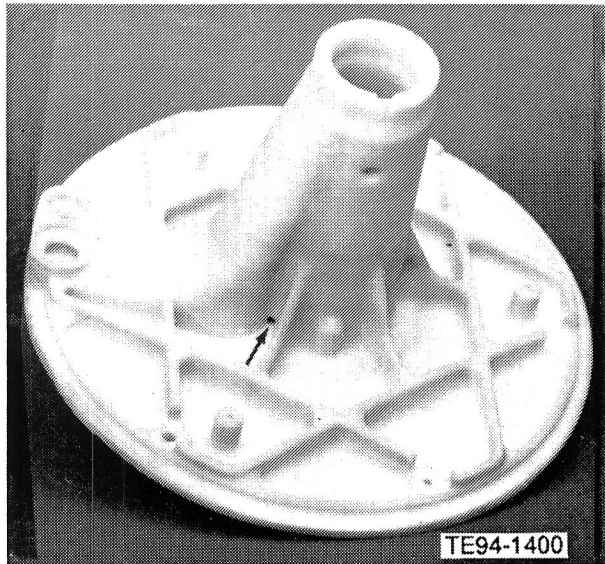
Gasifier housing polycarbonate prototype (arrow shows tool path breakout area).
